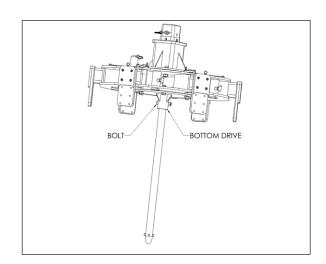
Inserting Guide Shaft Into Bottom Drive Assembly
